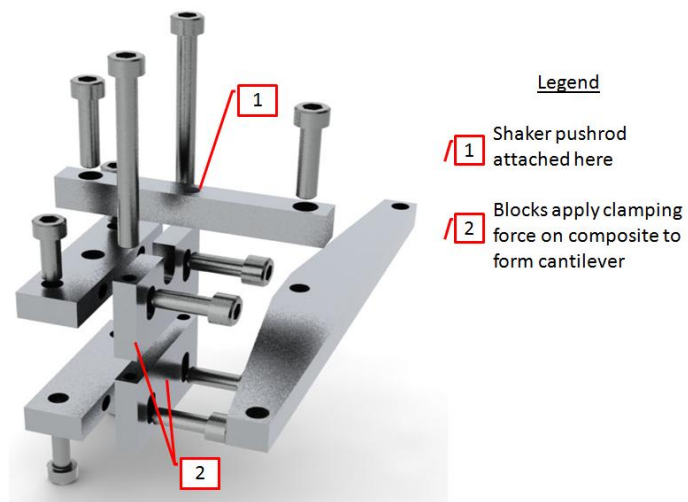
Exploded view of aluminum fixturing used to cantilever composite to magnetic circuit and interface with a shaker
